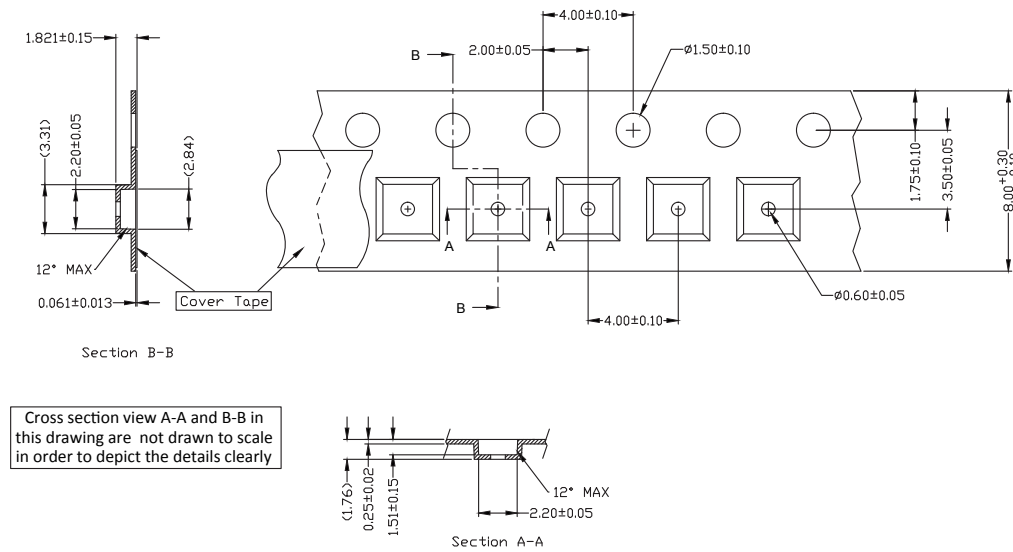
Pocket Tape dimensions for LUXEON C Color Line.
